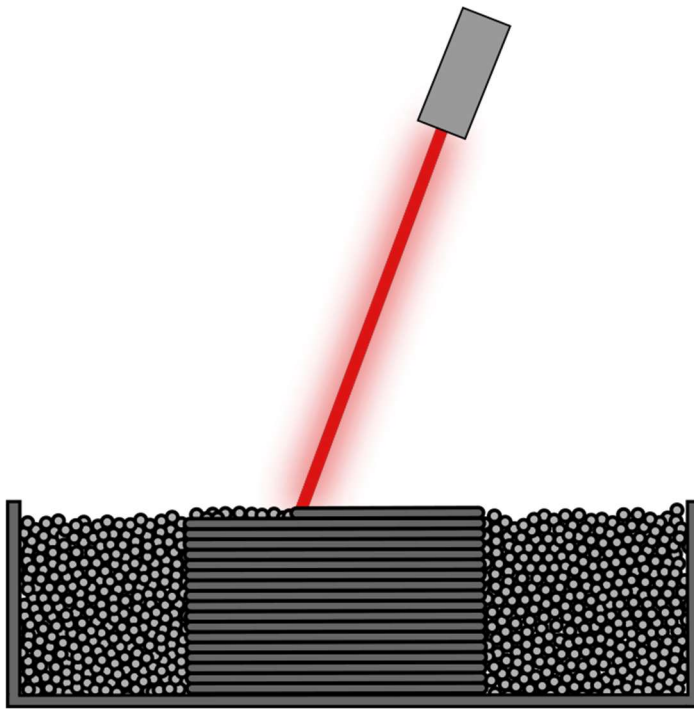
Illustration of selective laser sintering using metal powder (grey) fusion by laser (red) melting.
